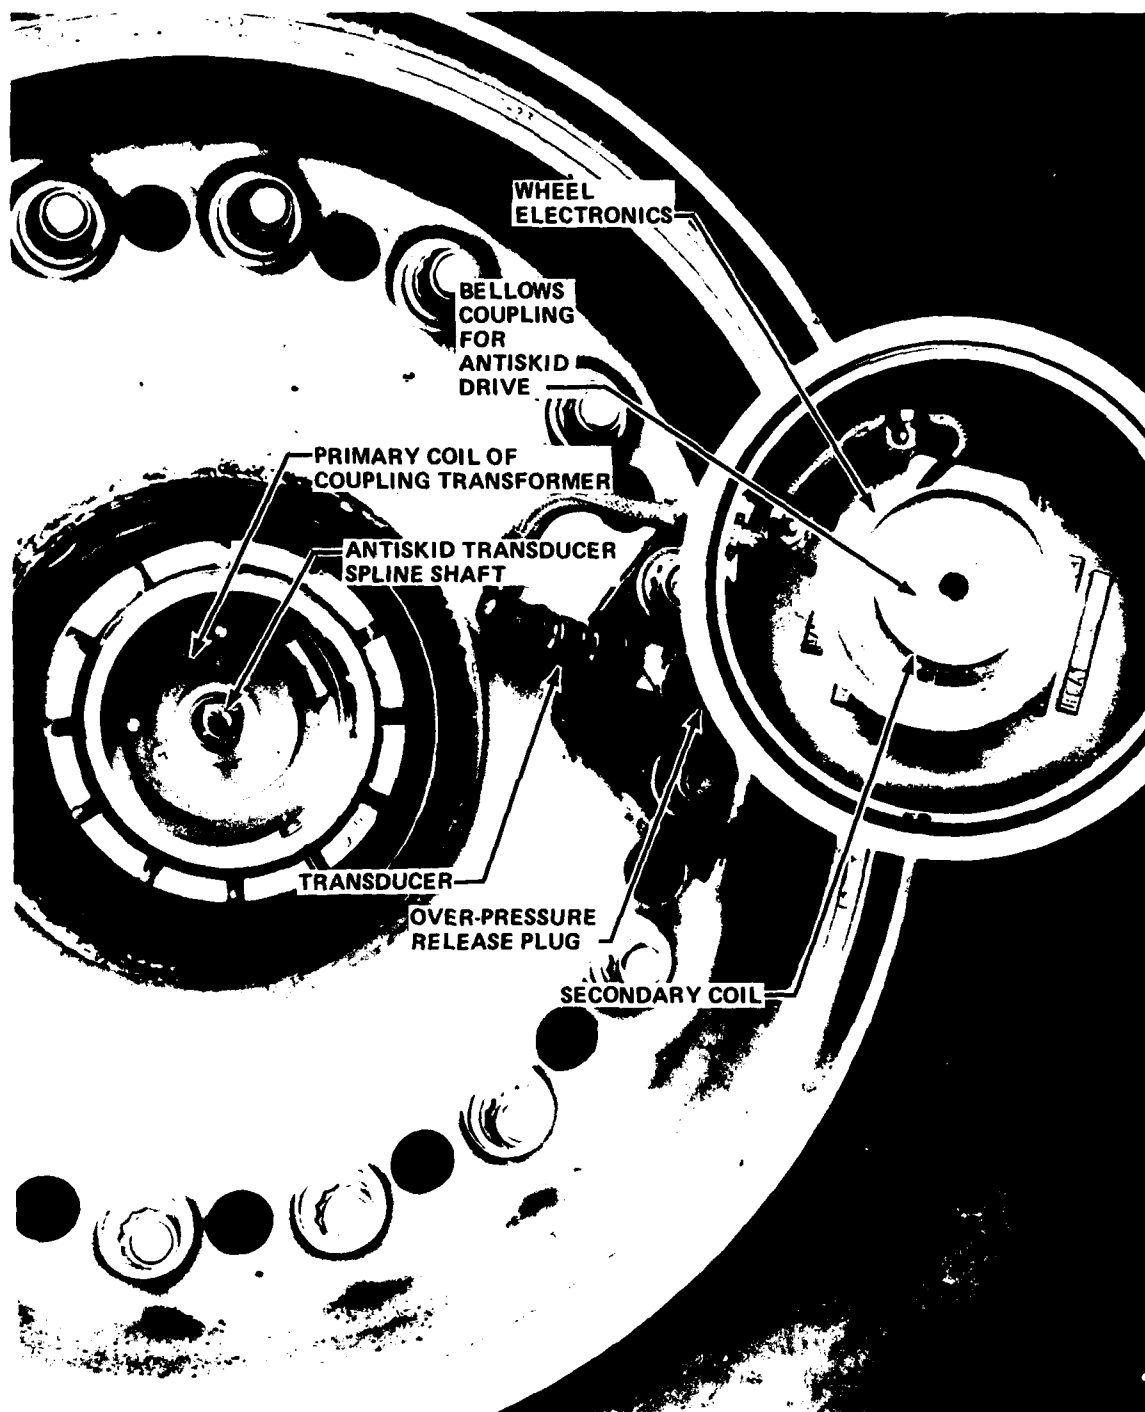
TYPICAL INSTALLATION FOR HUBCAP COUPLING AND WHEEL ELECTRONICS
